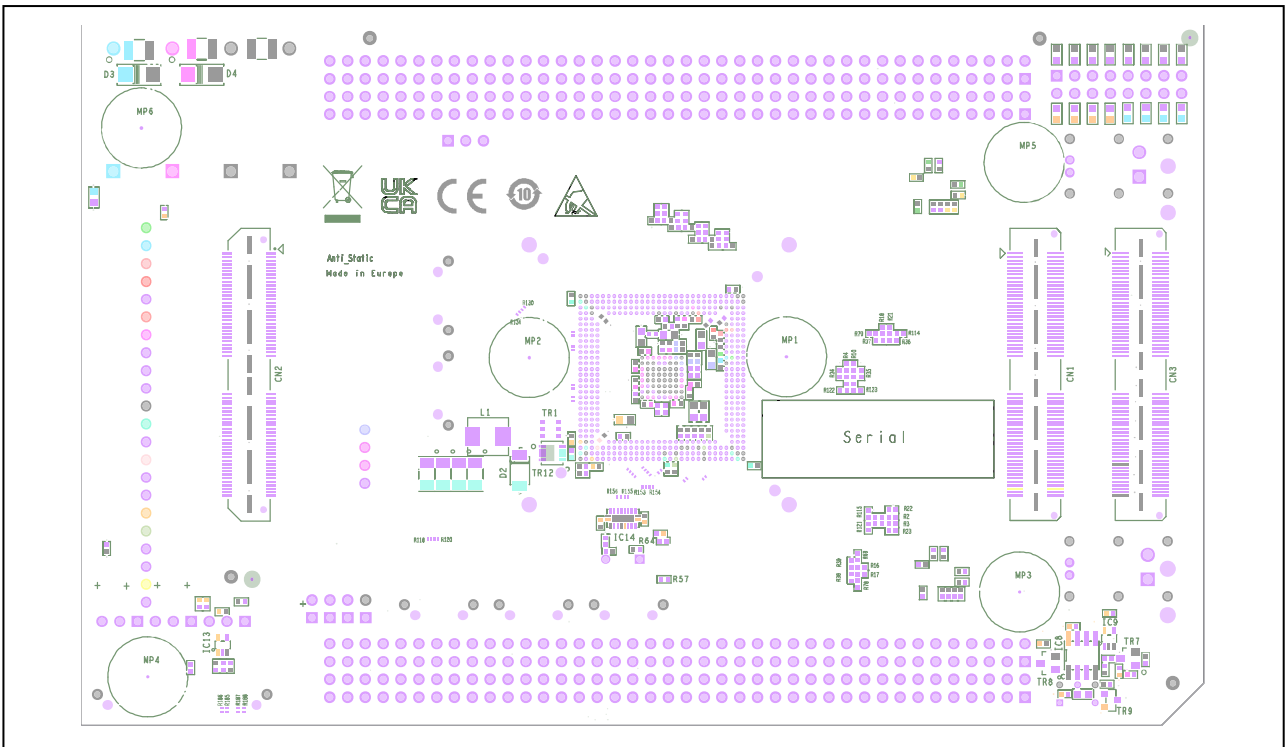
D018177_06_V01 Piggyback Board bottom view
